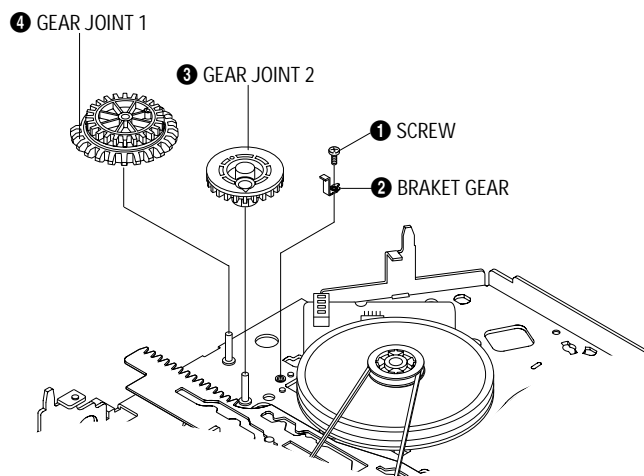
Bracket Gear, Gear Joint 1,2 Removal
